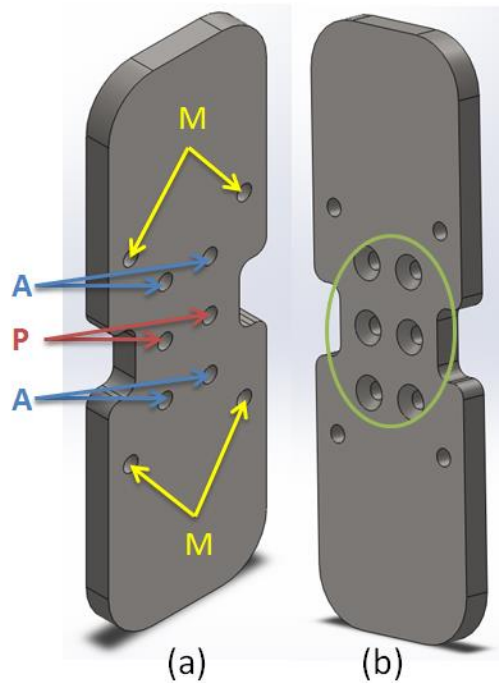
Layout of Holes in Back Plate – Part (a) is an isometric view of the back plate, where the yellow arrows labeled with “M” refer to the mounting holes (used for the anterior fixture only), the blue arrows labeled with “A” refer to the holes used in the anterior fixture, and the red arrows labeled with “P” refer to the holes used in the posterior fixture. Part (b) is a back side isometric view of the back plate, where the green circle points out the countersunk holes. The mounting holes were not used in the actual design, but mounting was done similarly with vice/clamps during actual testing.
